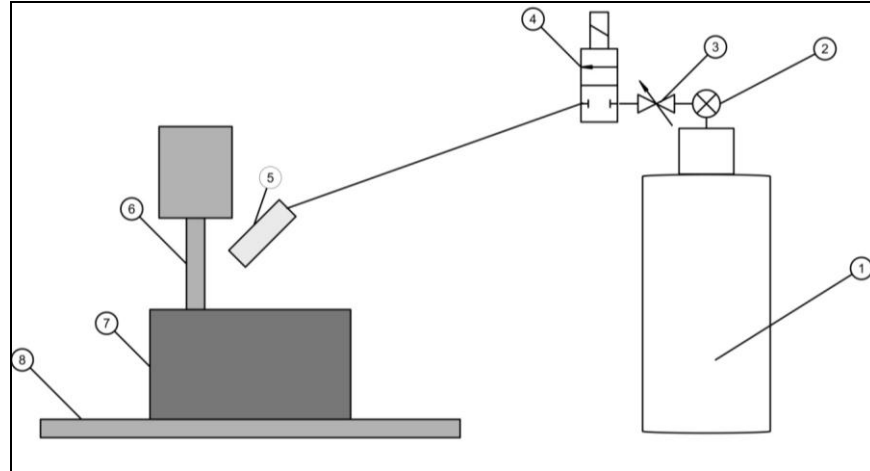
Schematic setup for cryogenic machining, 1-Liquid nitrogen Dewar, 2- pressure gauge, 3- gate valve, 4- solenoid on/off valve, 5- specially designed nozzle, 6- cutting tool, 7- workpiece, 8- machine table
